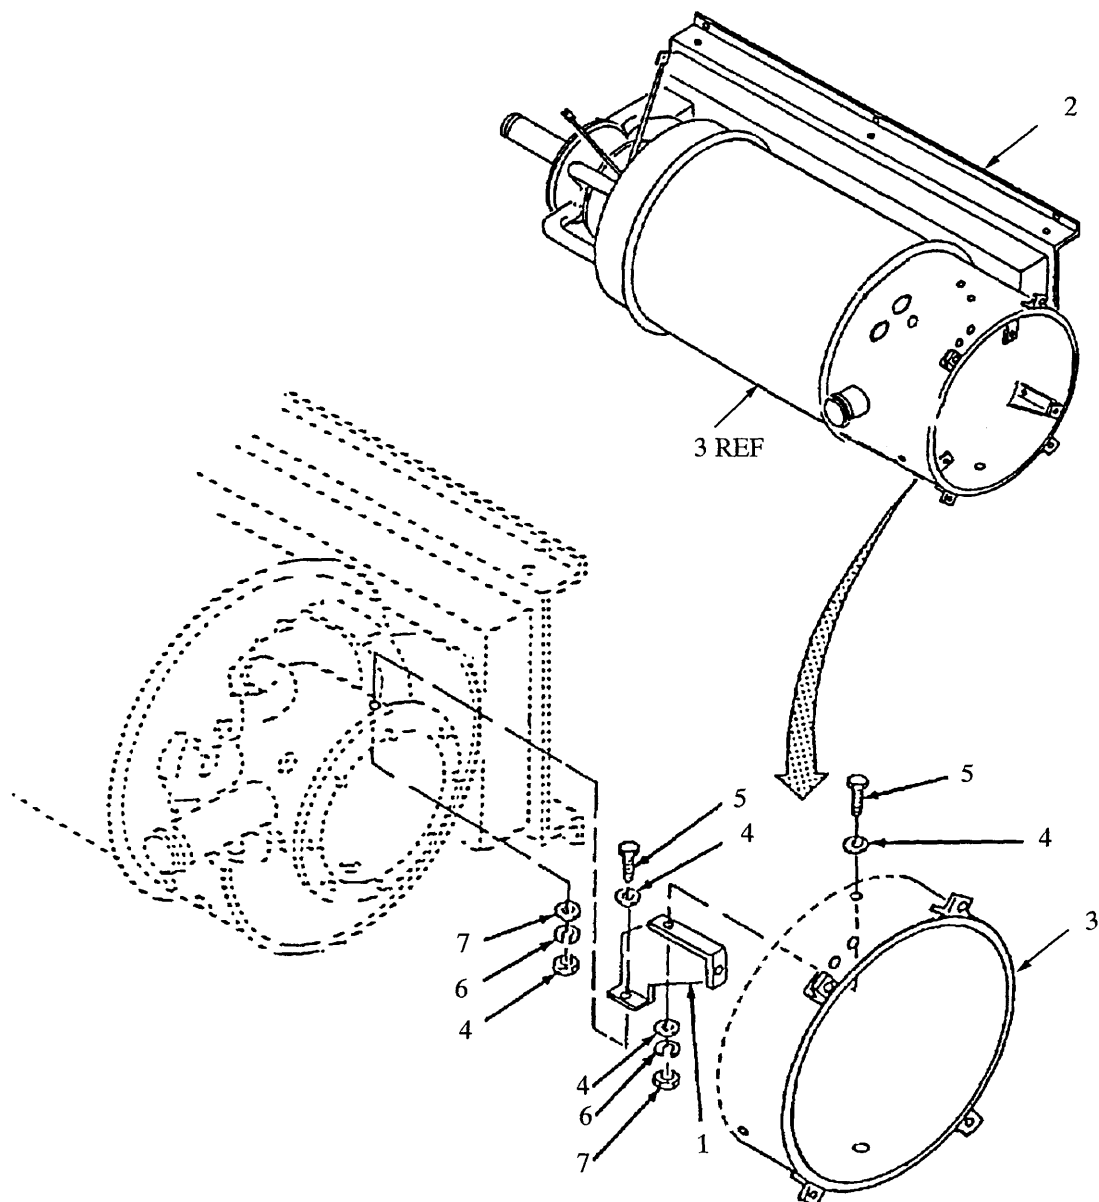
Heat Exchanger, (Model H120-1) Assembly
